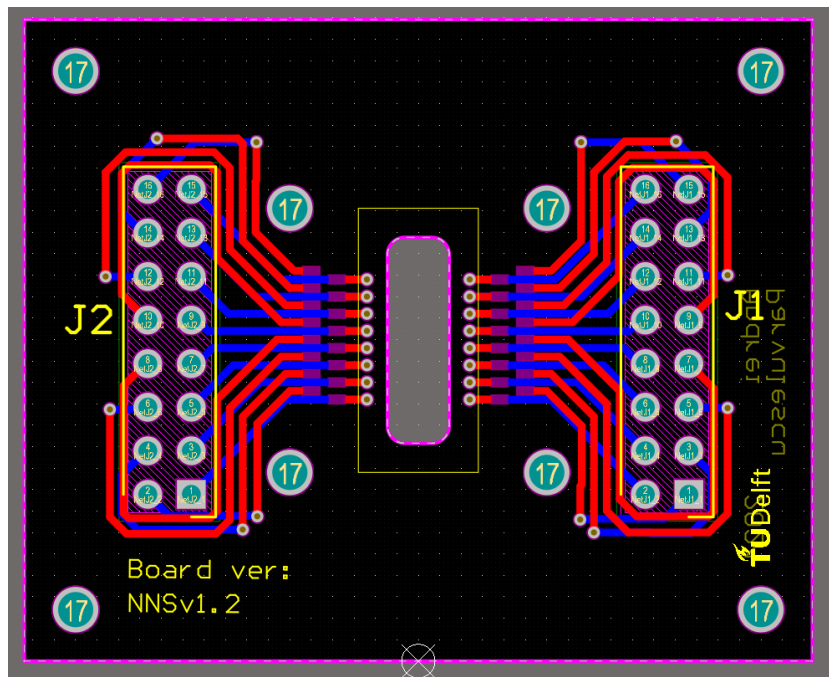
Layout of the PCB for the thruster configuration without nozzle. The placement of the thruster is indicated by the thin yellow lines. The fluidic interfaces (inlet and outlet) would be placed at the bottom and top. The external dimension of the board is 46×37.5 mm.
